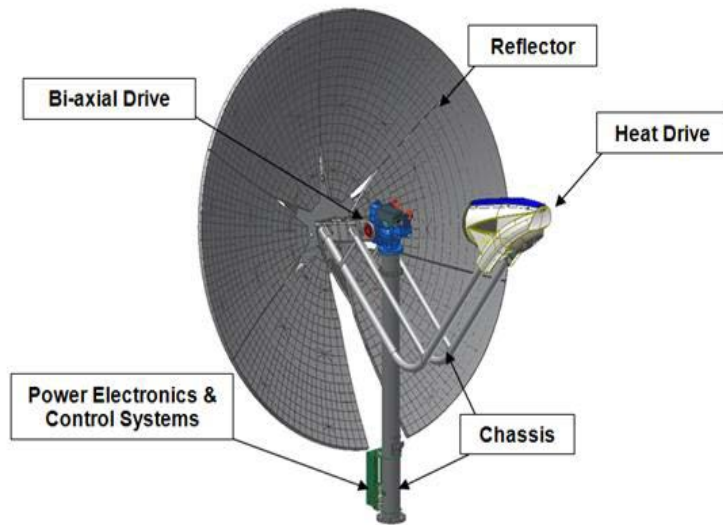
PowerDish Components; Heat Drive components shown with shell removed
